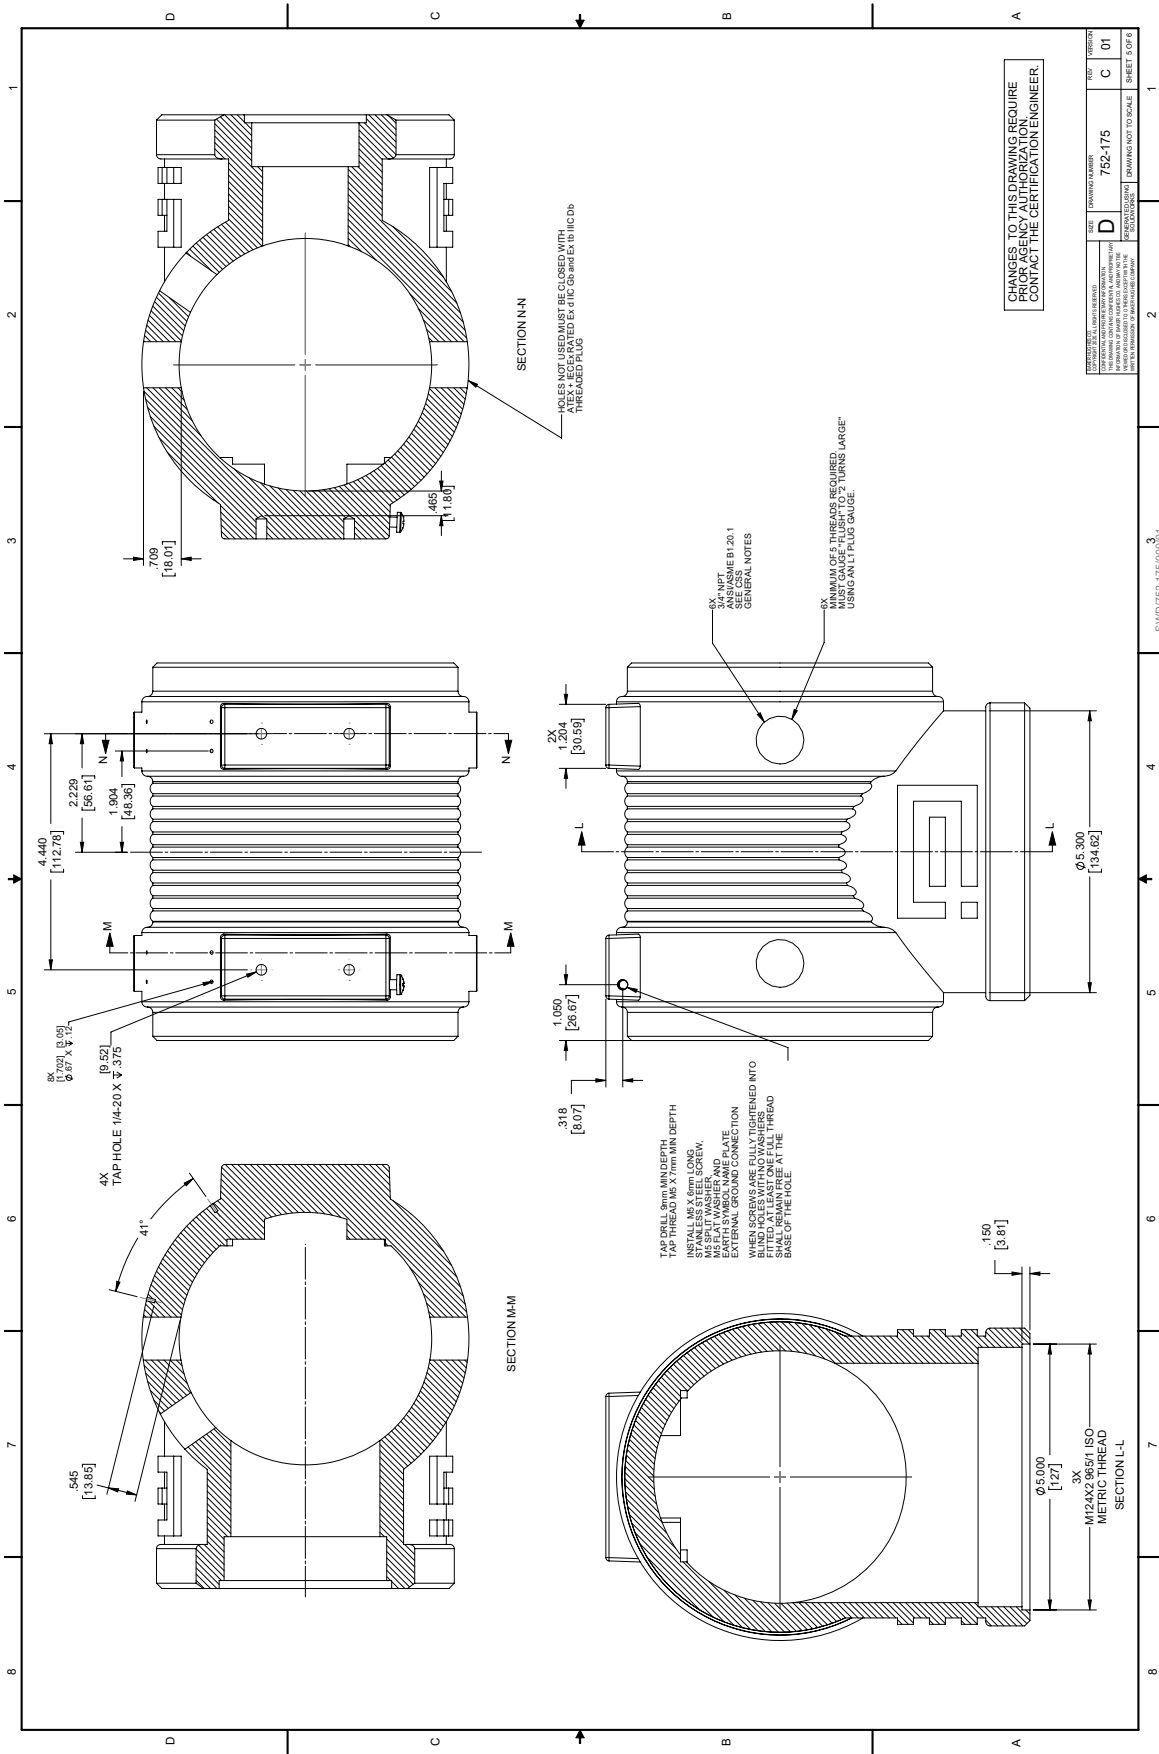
XDP certification drawing, Cenelec (752-175revA, sheet 5 of 6)
